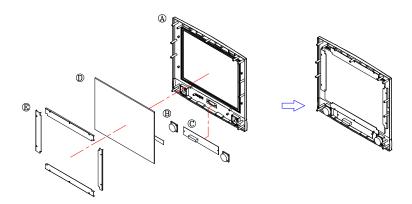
LP 1500 FRONT BEZEL MODULE ASSEMBLY
